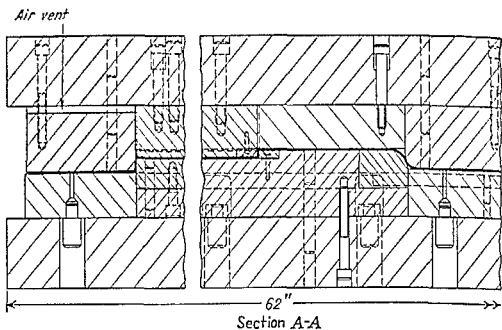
Sections through the first draw die for the part shown in Fig. 12-31. (Mills Industries, Inc.)
